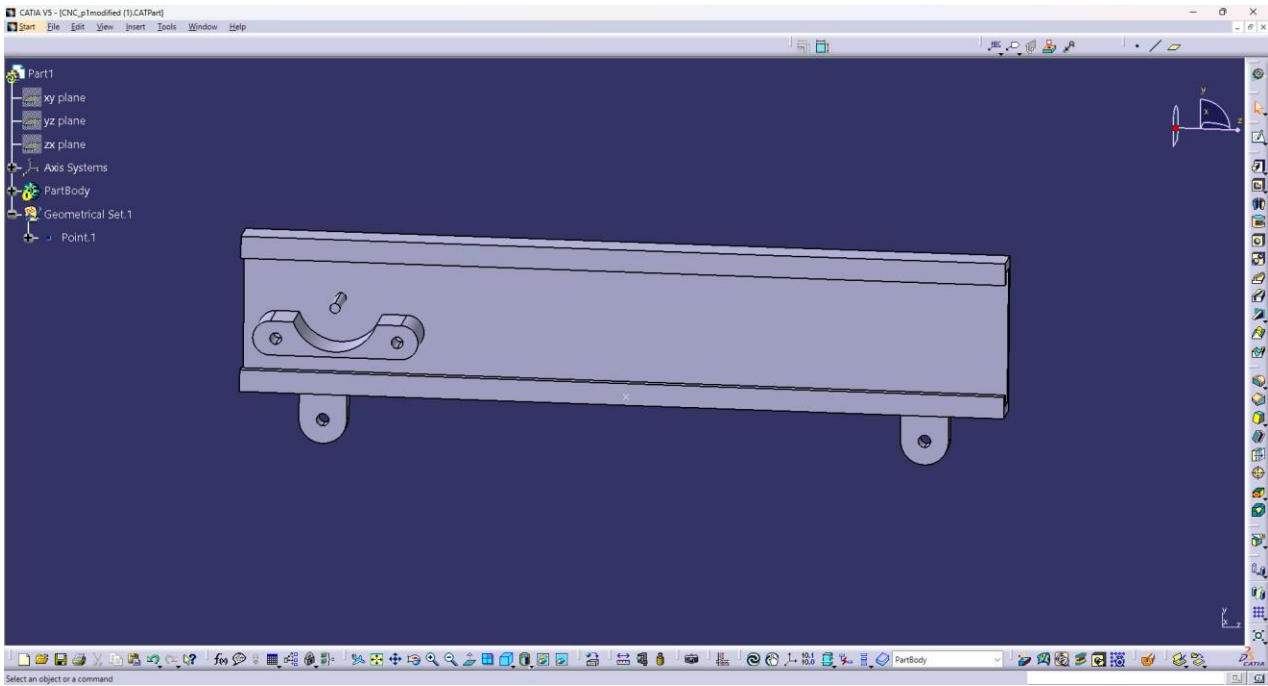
3D Printed CNC Plotting Machine- Parts
